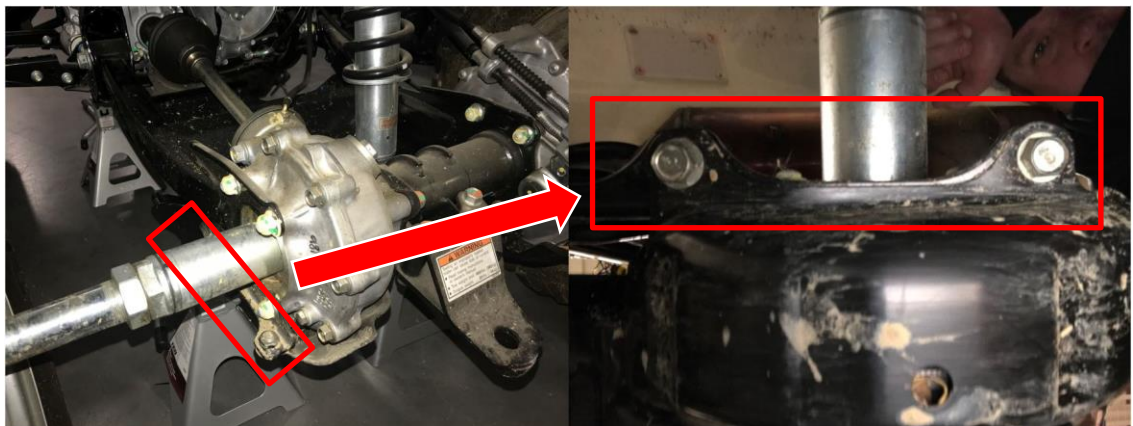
Rear axle and bracket assembly of the ATV
